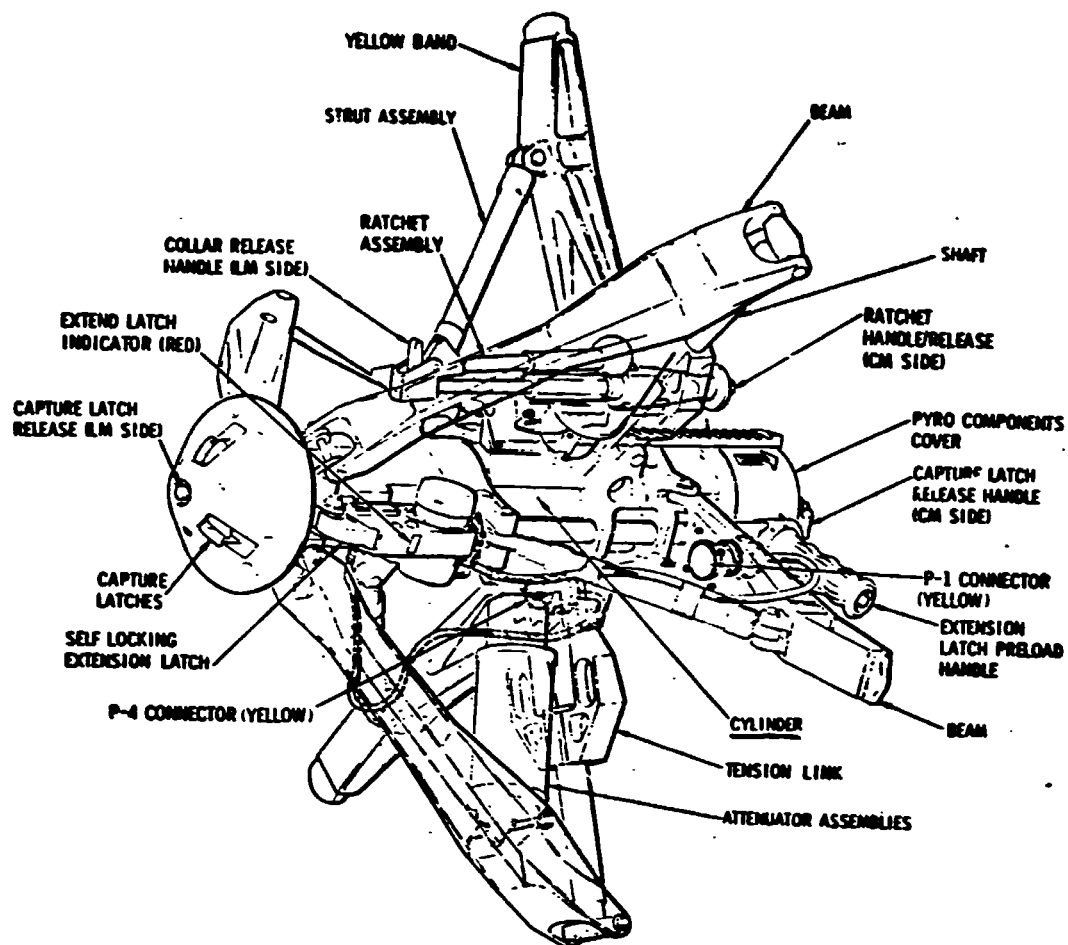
DOCKING PROBE ASSEMBLY.
